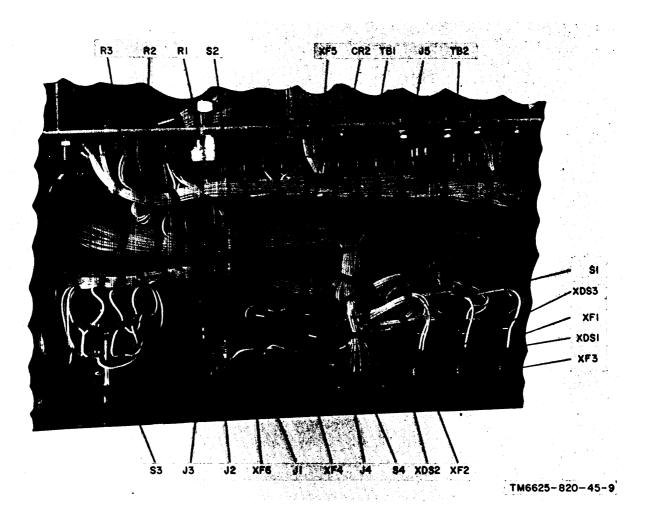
Bottom view of Test Set, Radio TS-2500/ARM-92, front panel.
